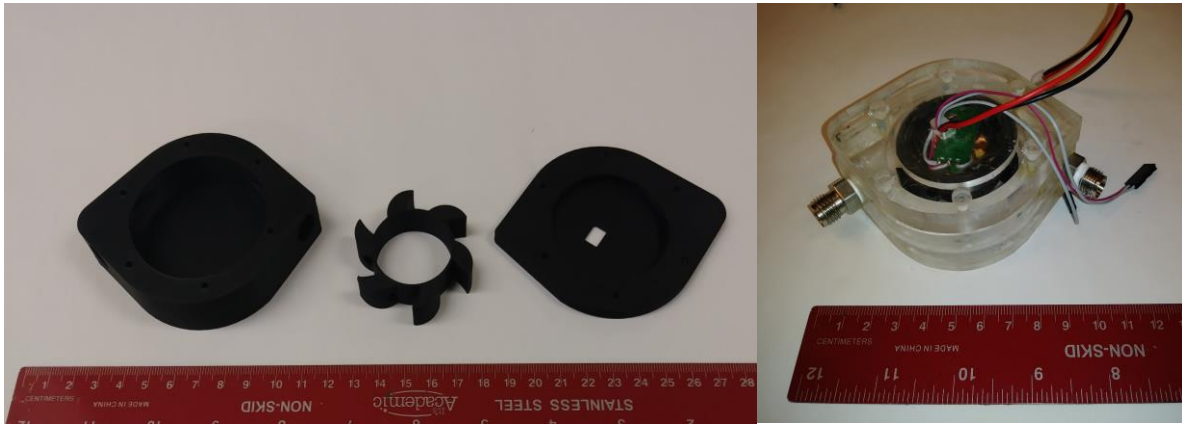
LST casing rotor and lid 3D printed in ABS on the left and CNC-machined LST assembled for testing on the right.
